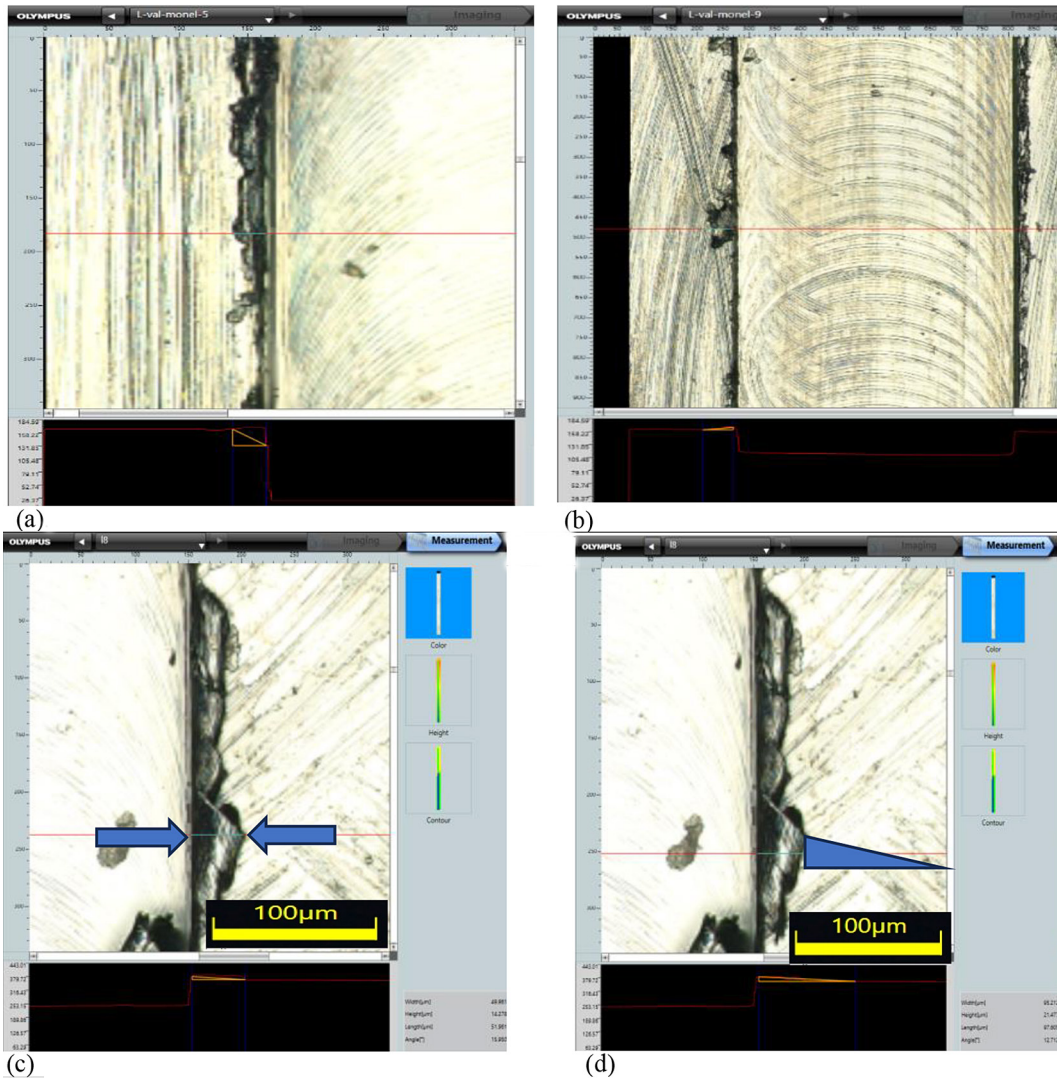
Burr measurement: (a) top burr width measurement; (b) top burr height measurement; (c) top burr width measurement; (d) top burr height measurement
